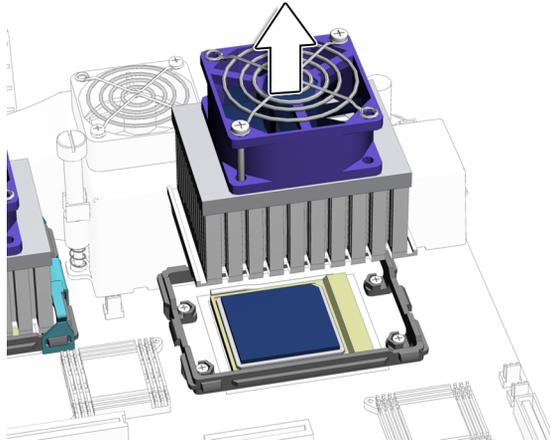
Removing the CPU Fan and Heat Sink Assembly
